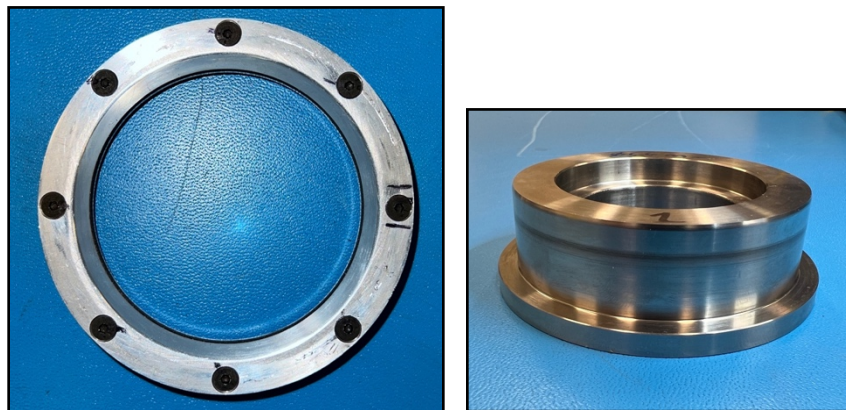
A CNT-metal mesh seal (ID: 66 mm) and shaft after a 160-hr compressor durability test using floating mounting. No obvious plastic deformation or wear on the seal ID and a layer of carbon transfer film on the shaft (no surface damage).
